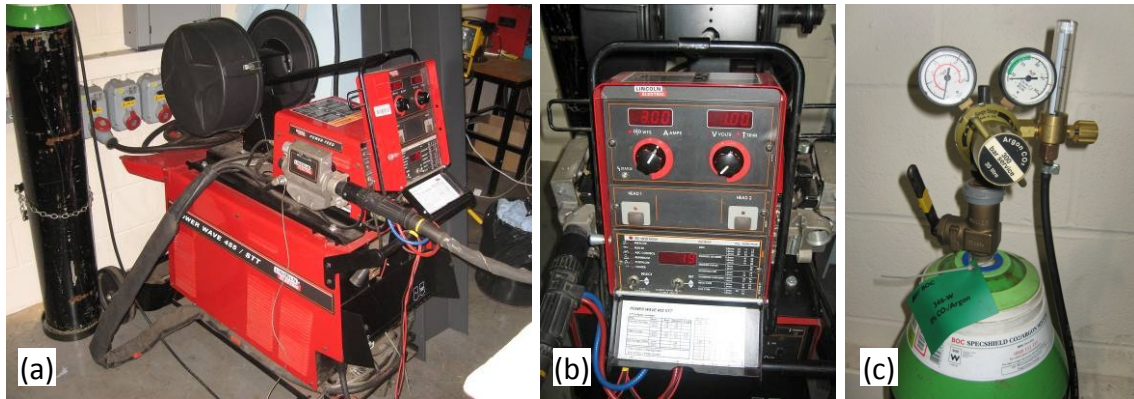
Welding set used for the preliminary single layer deposition studies (a) welding power source Lincoln Power Wave® 455/STT, (b) welder front panel, (c) shielding gas mixture Ar/CO₂ (8%).
